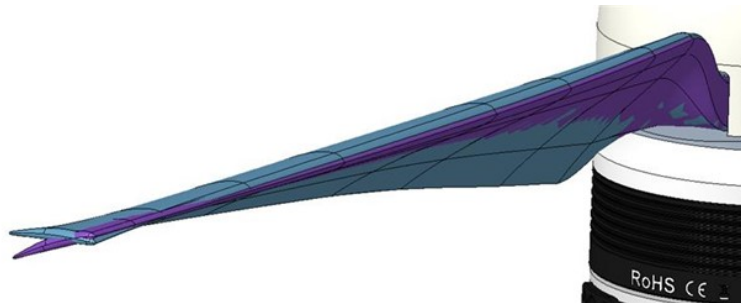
CAD Models of Final Prandtl and MIL Blades - Front
